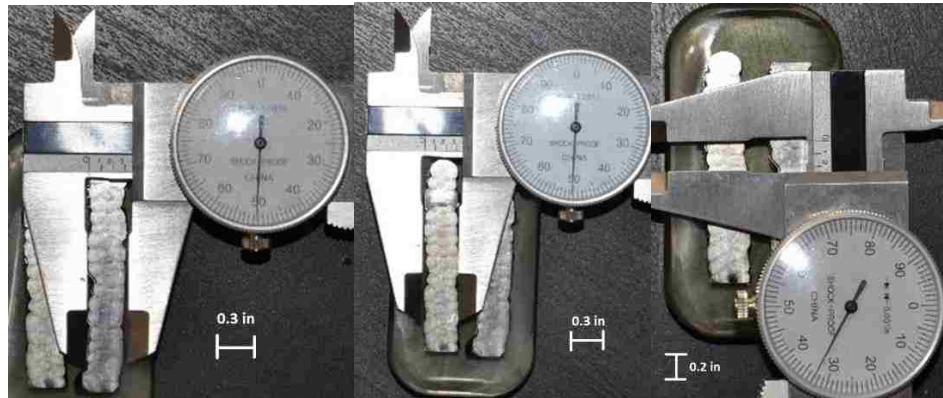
Three pictures showing the dimensions of the printed layer.
